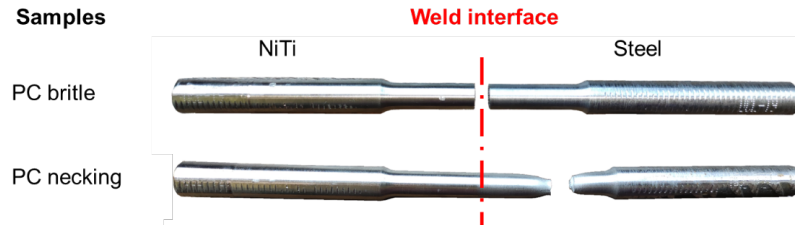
Tensile samples of the NiTi SMA and steel bars joined through friction welding (Lezaack *et al.*, 2022). Position control (PC) machine. Necking samples show fracture strength similar to the steel rebars.
